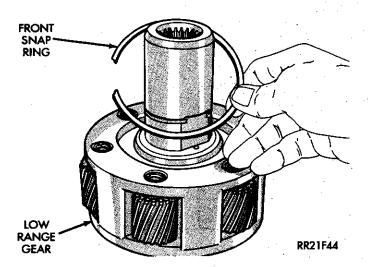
Removing/Installing Low Range Gear Snap Ring
